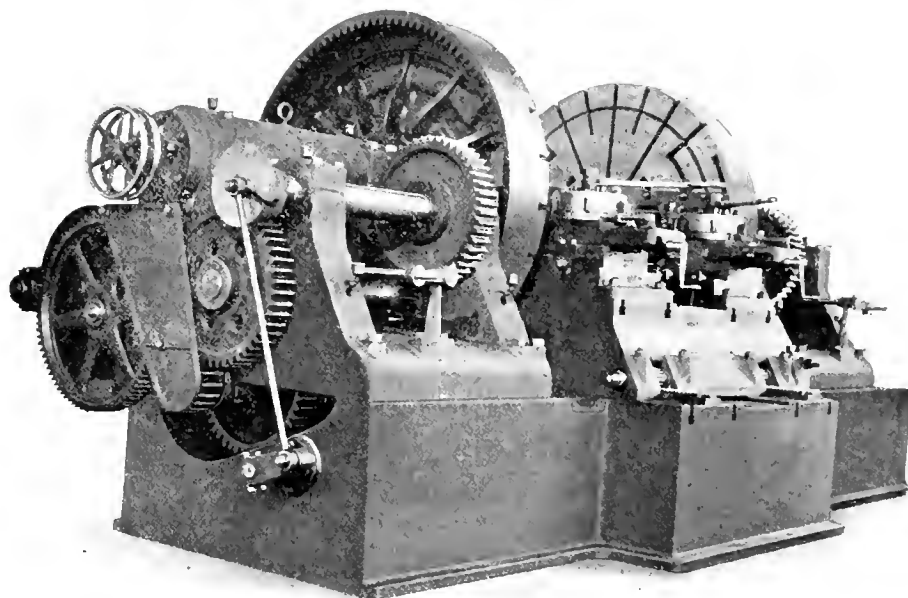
End View, showing Driving Gearing and Feed Motion.
